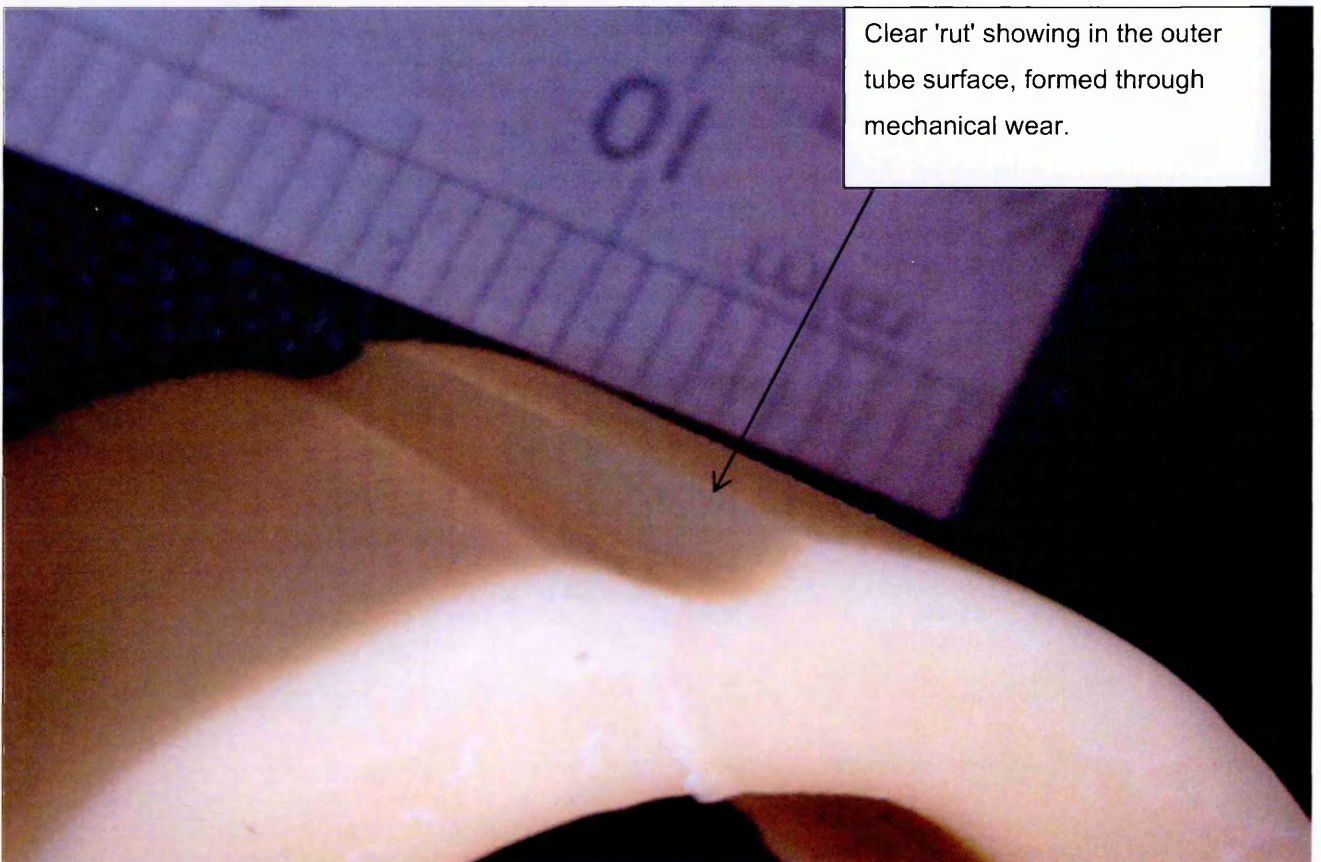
Section 2 through an EPDM/PP blend tube showing damage due to mechanical wear
